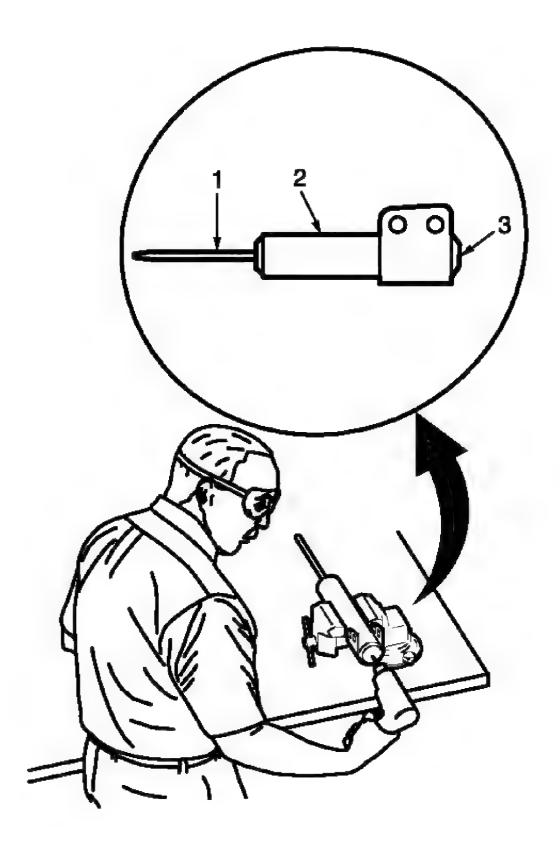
Drilling Hole In Strut At Center Of End Cap
